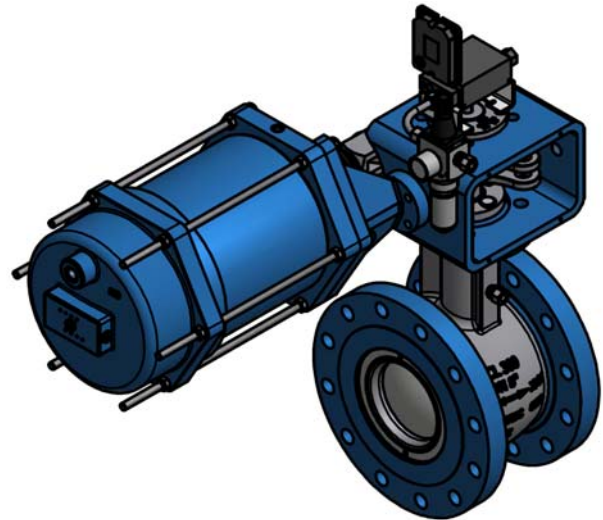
VETEC Rotary Plug Valve – Type 82.7 (example with mounted Type R Actuator)
